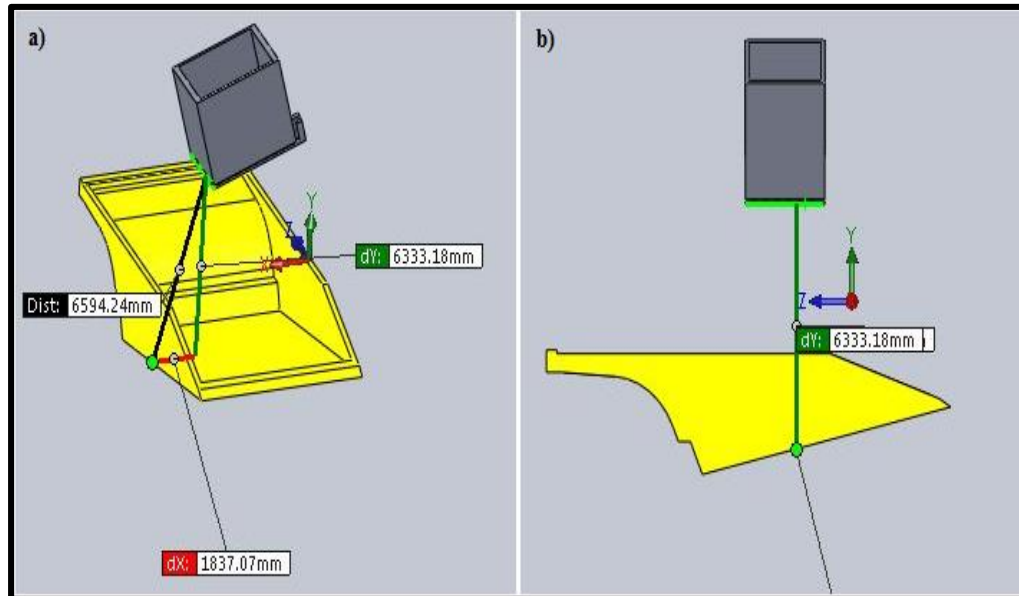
Truck Body and Shovel Dipper CAD Assembly for $H_t = 6.33$ m (6333 mm):
